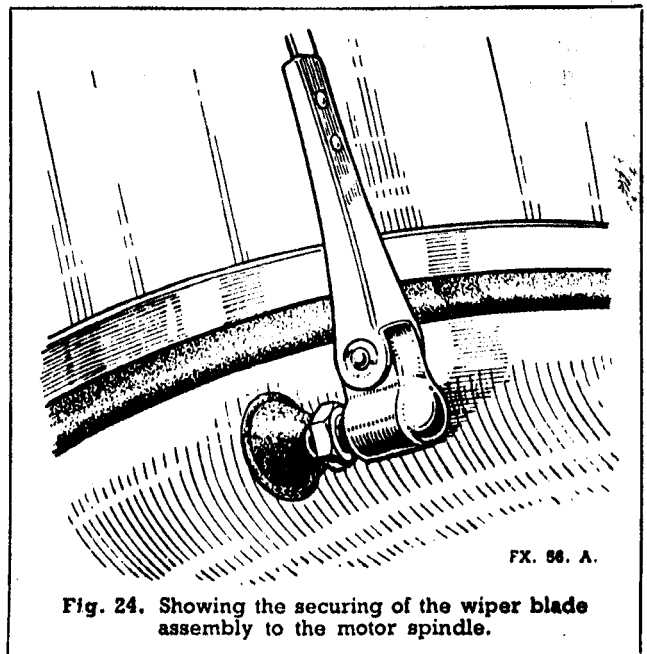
Showing the securing of the wiper blade assembly to the motor spindle.
